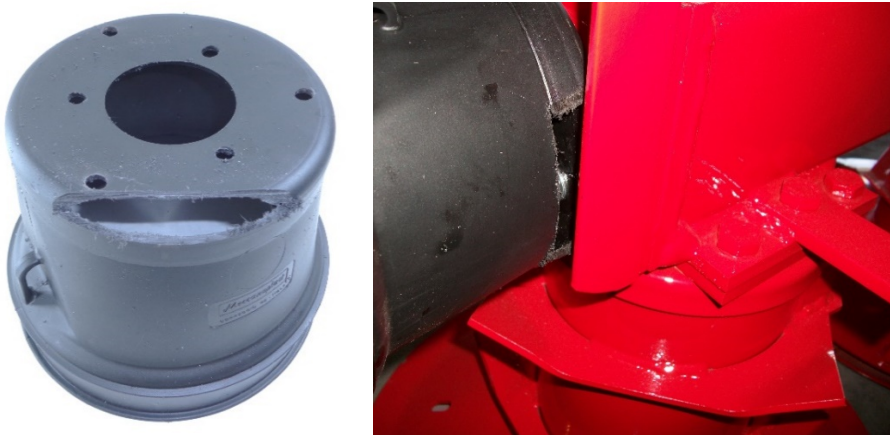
the guard with the notched out area is installed on the drum unit as shown (cutout may look different on your machine)
